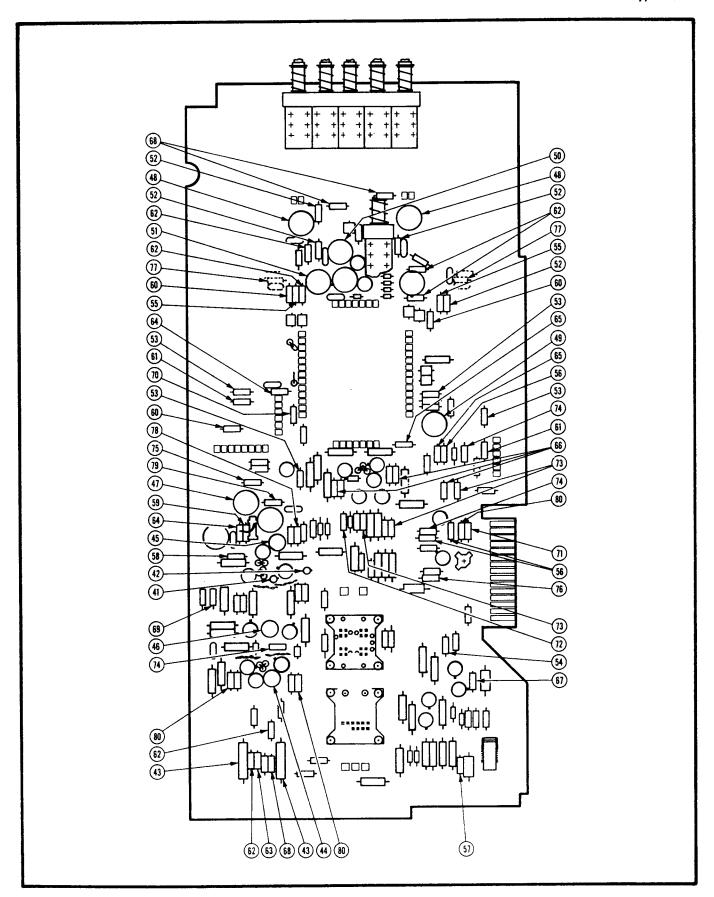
Circuit Board Assembly, Vertical (Sheet 2 of 4).
